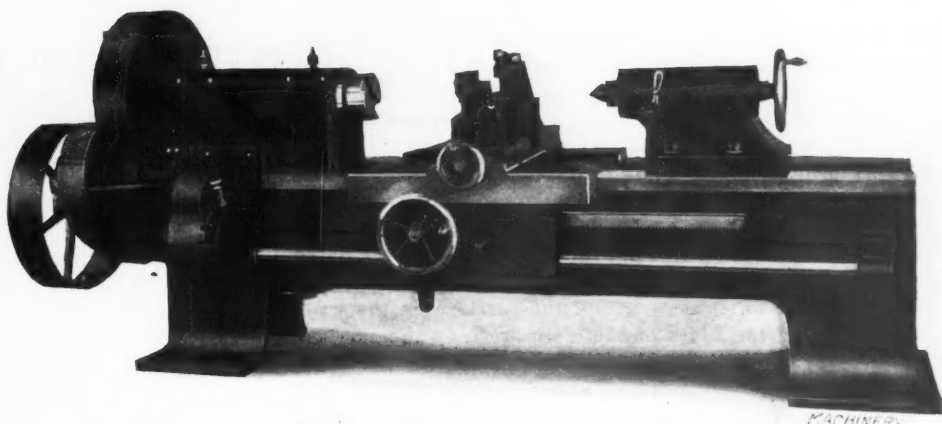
Pottstown 24-inch Lathe for machining Shells from 9 to 12 Inches
